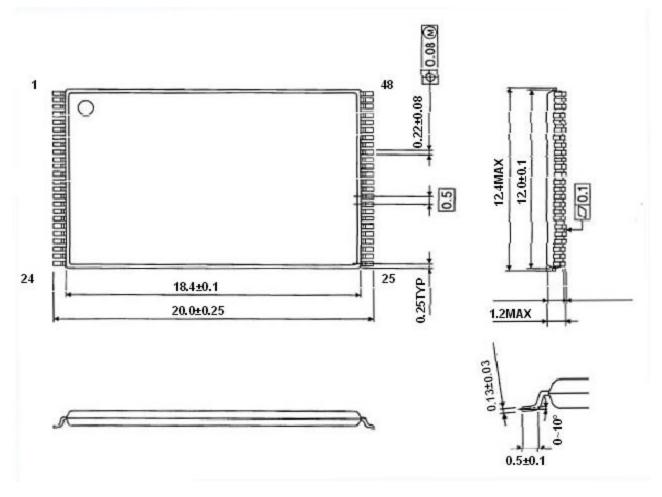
DiskOnChip 2000 TSOP 16MB Mechanical Dimensions
